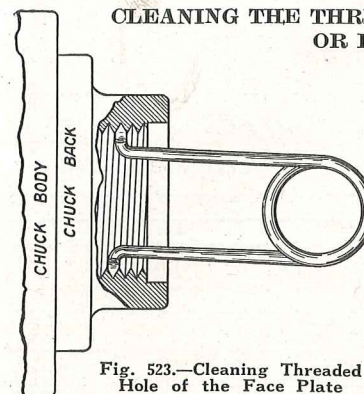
Cleaning Threaded Hole of the Face Plate
